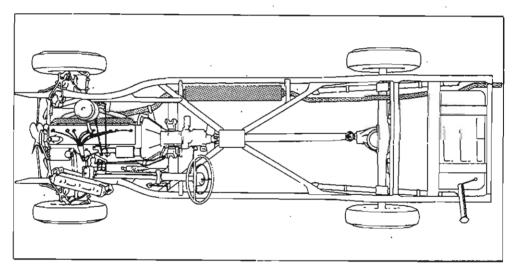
The Exhaust System Consists of Four Major Parts: the Manifold, Pipe Assembly, Muffler, and the Outlet Tube.
